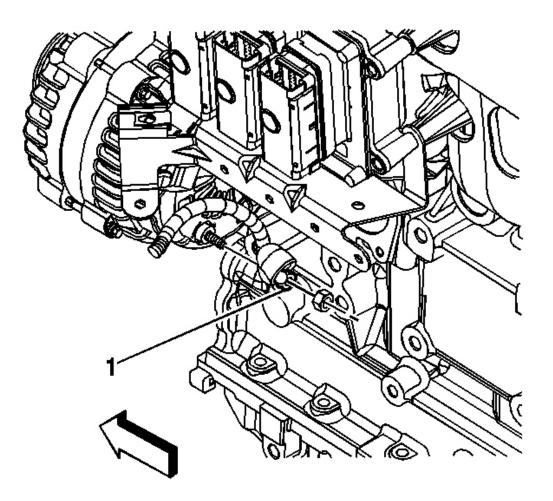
Rear Of Generator (Alternator) View Courtesy of GENERAL MOTORS CORP.
